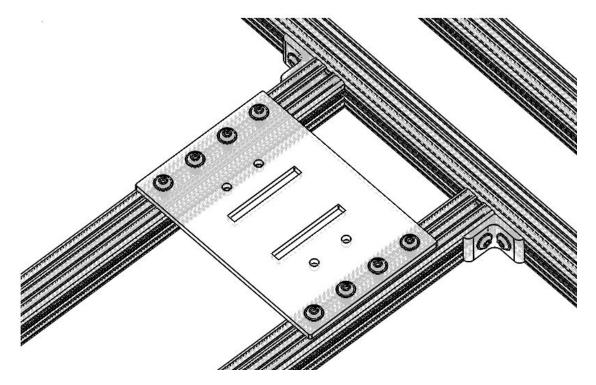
Fixture base plate (#KGT) fixed on the two 2ft beam (#QDXE) with end feed fasteners (#TEBK)
